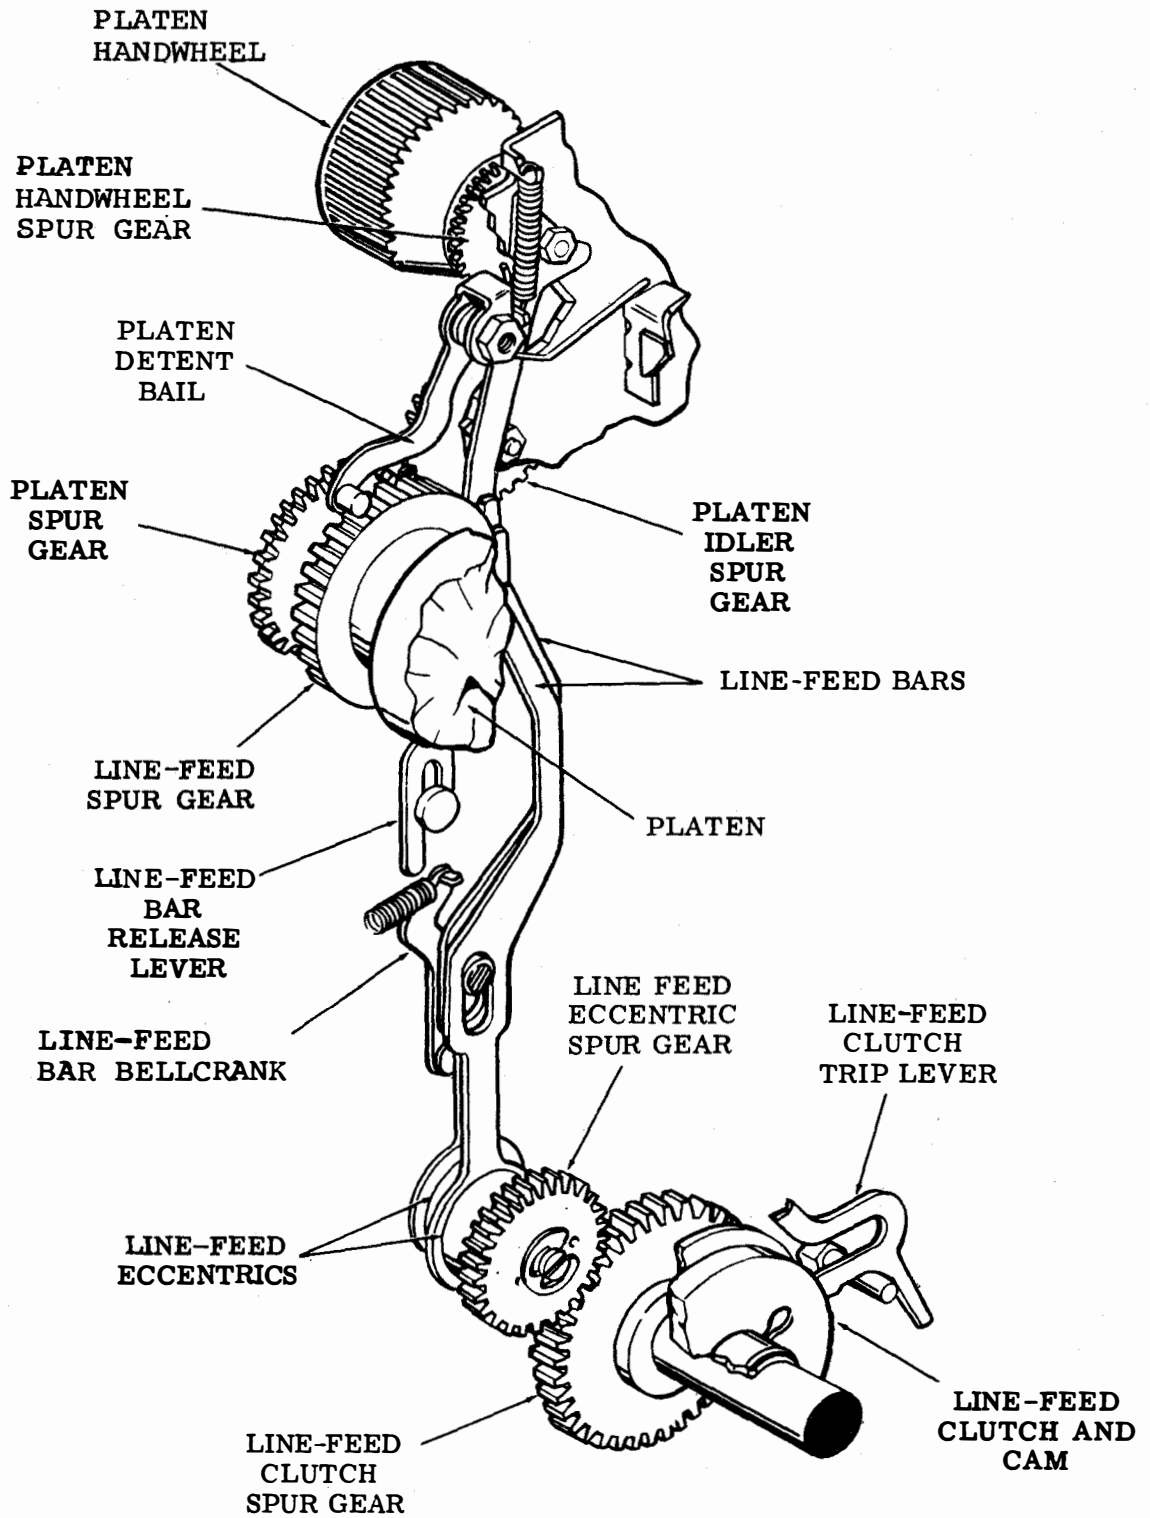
Line-Feed Mechanism and Spur Gear, Right Front View
